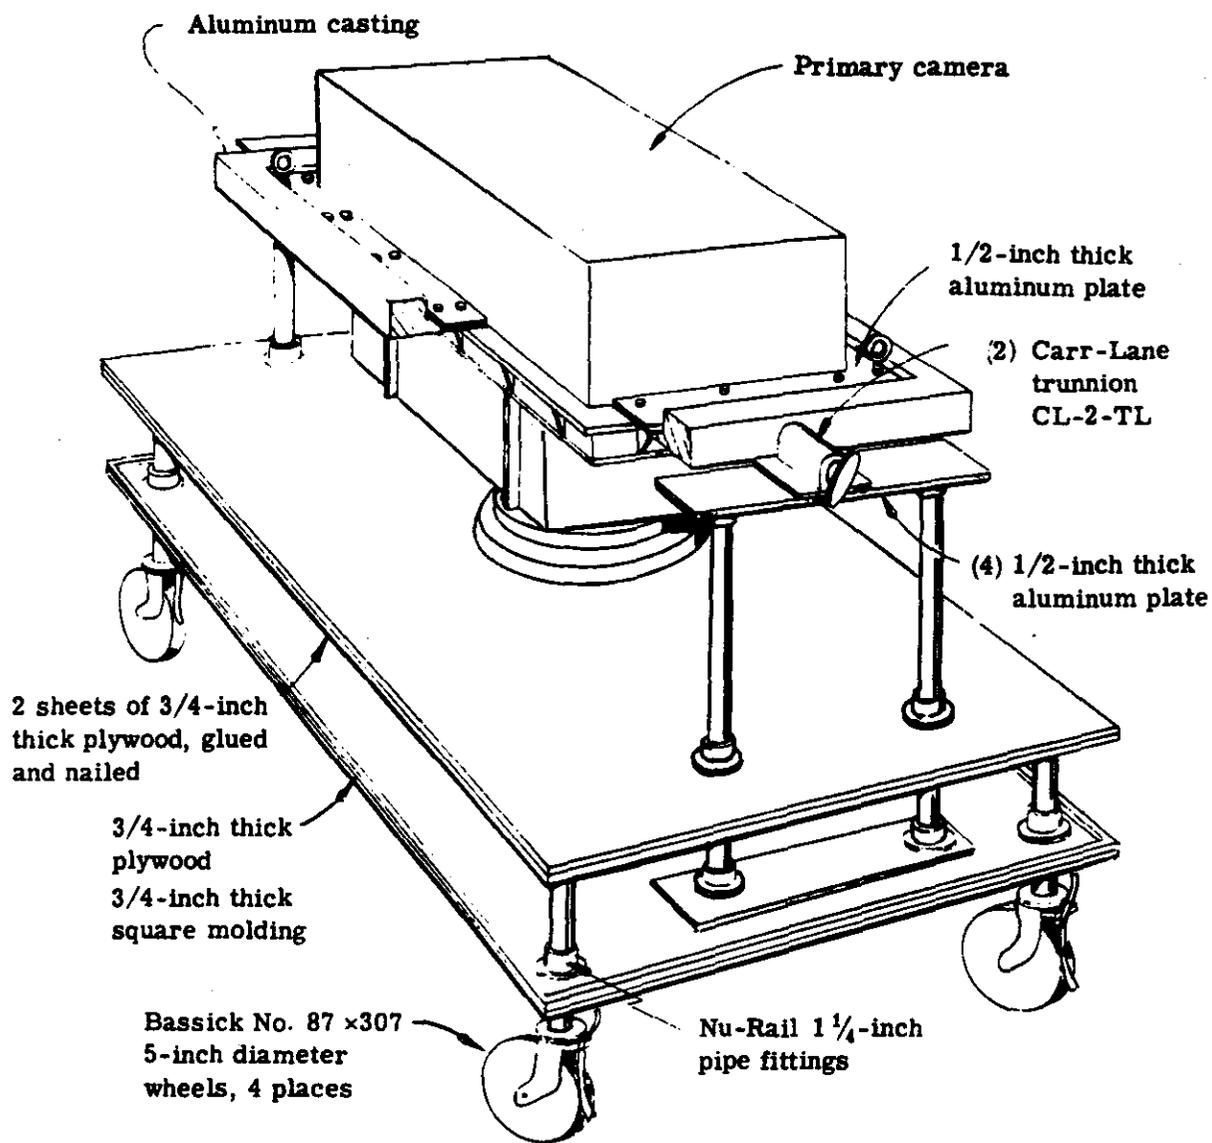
Terrestrial camera assembly fixture and dolly
